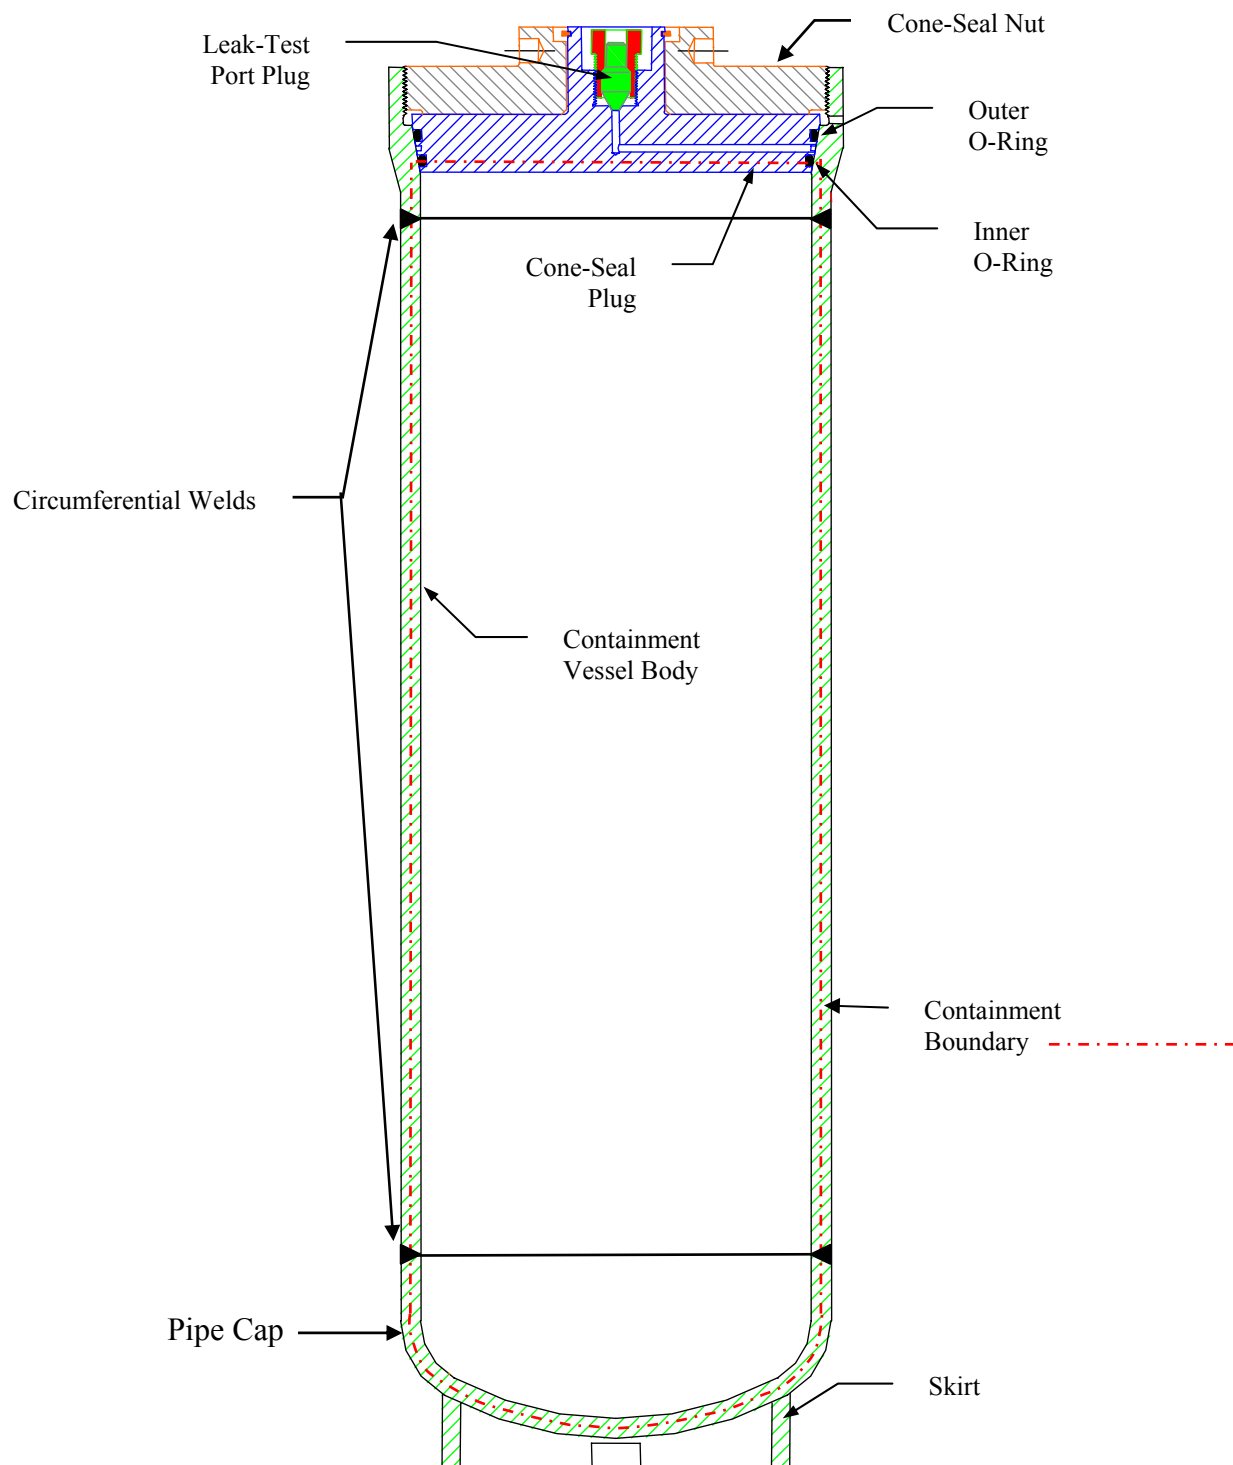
Containment Boundary for Containment Vessel Assembly (typical)
